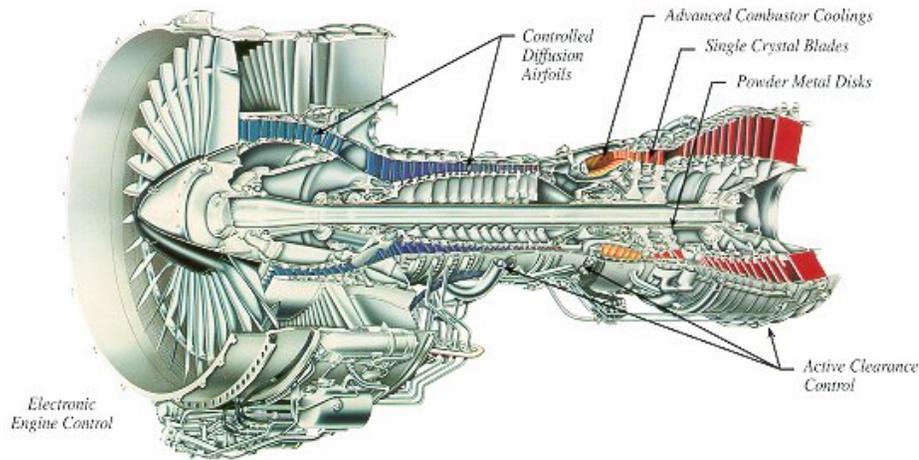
Cut-out View of F117-PW-100 Engine¹²
